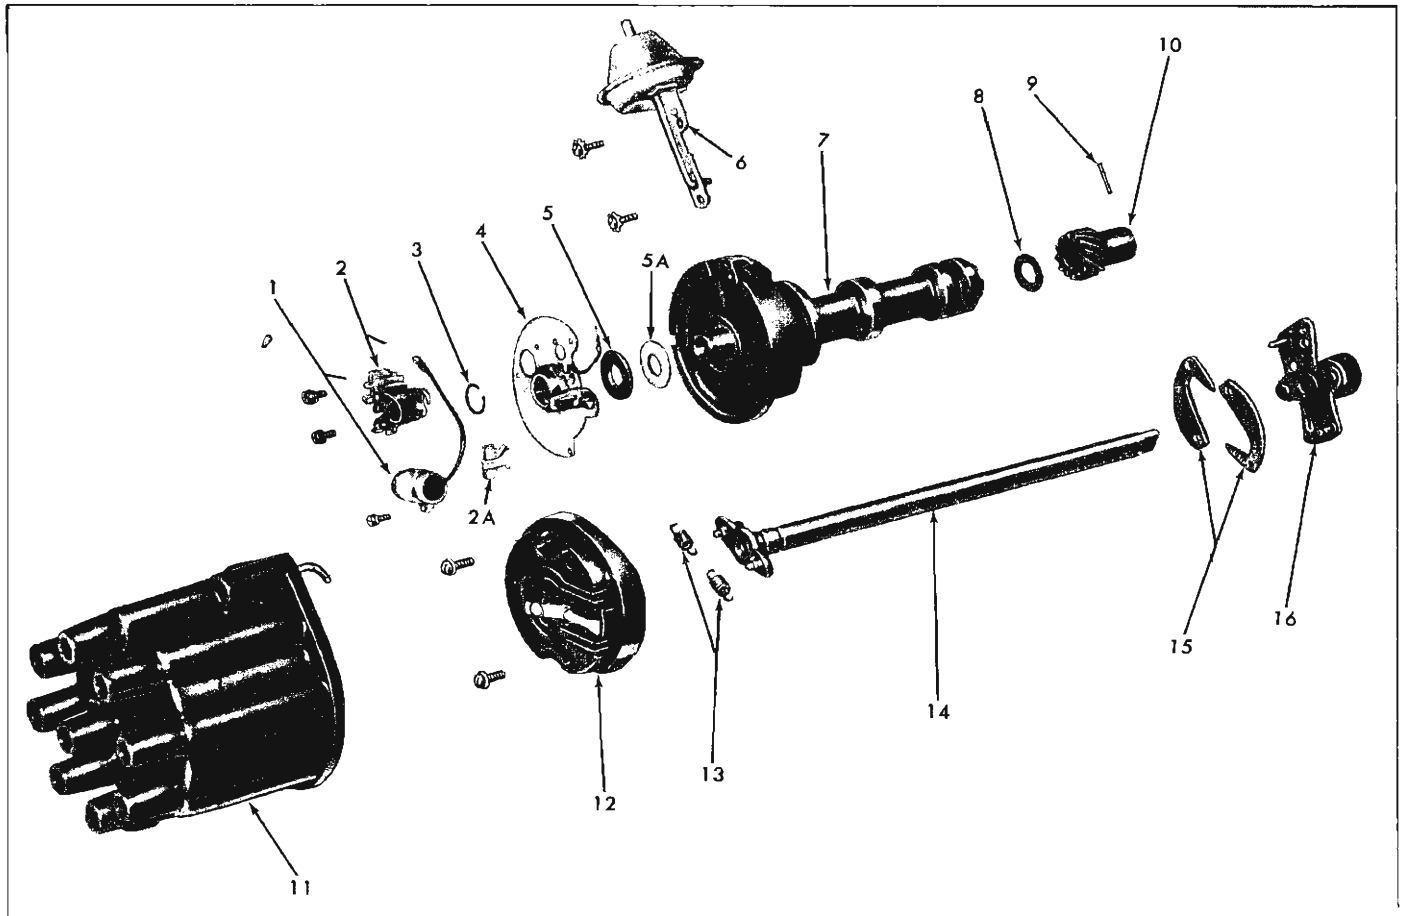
V-8 Distributor (Typical)—Exploded View
